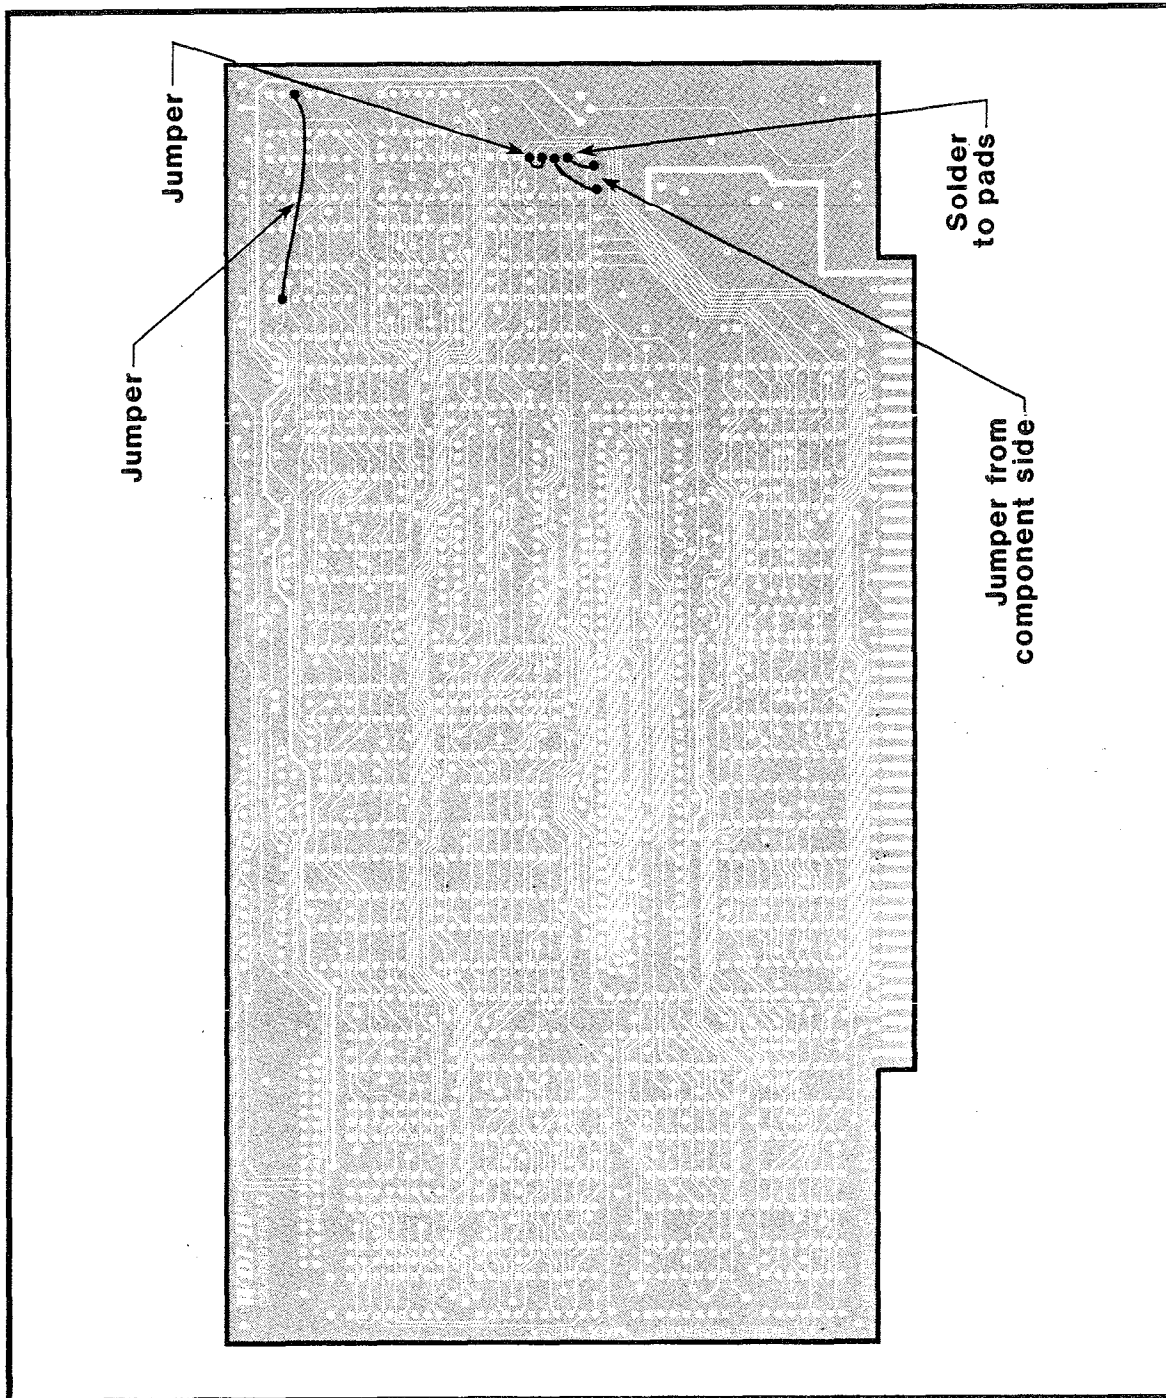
WDI-II MODIFICATIONS - SOLDER SIDE
